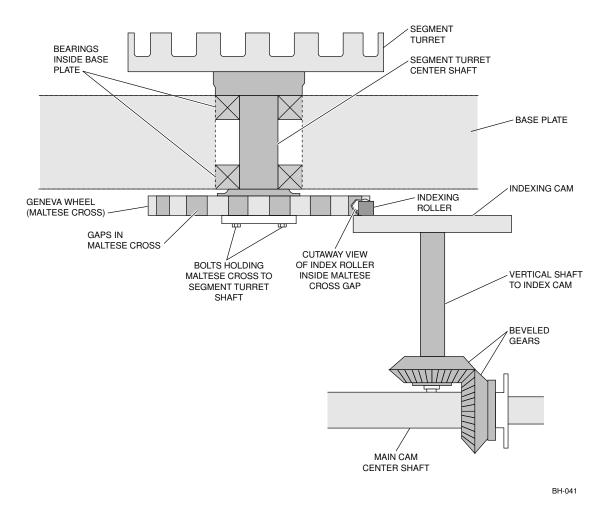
Side View of Segment Turret, Maltese Cross, and Capsule Index Cam
